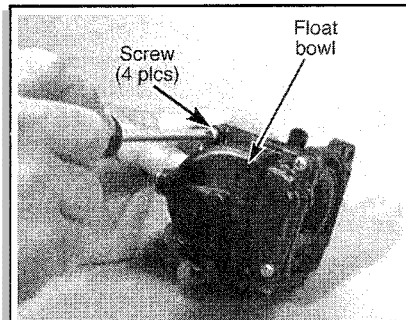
Remove the Phillips screws securing the float bowl to the carburetor body
